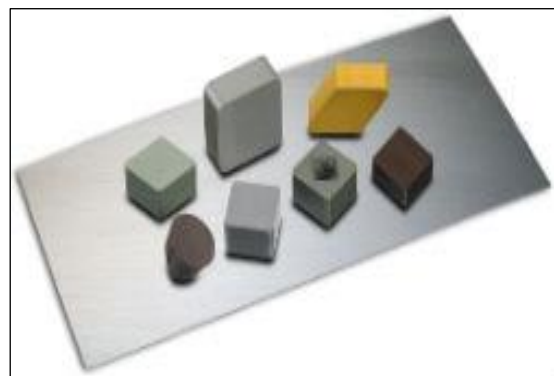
Ceramic Cutting Tool as Inserts [5].
